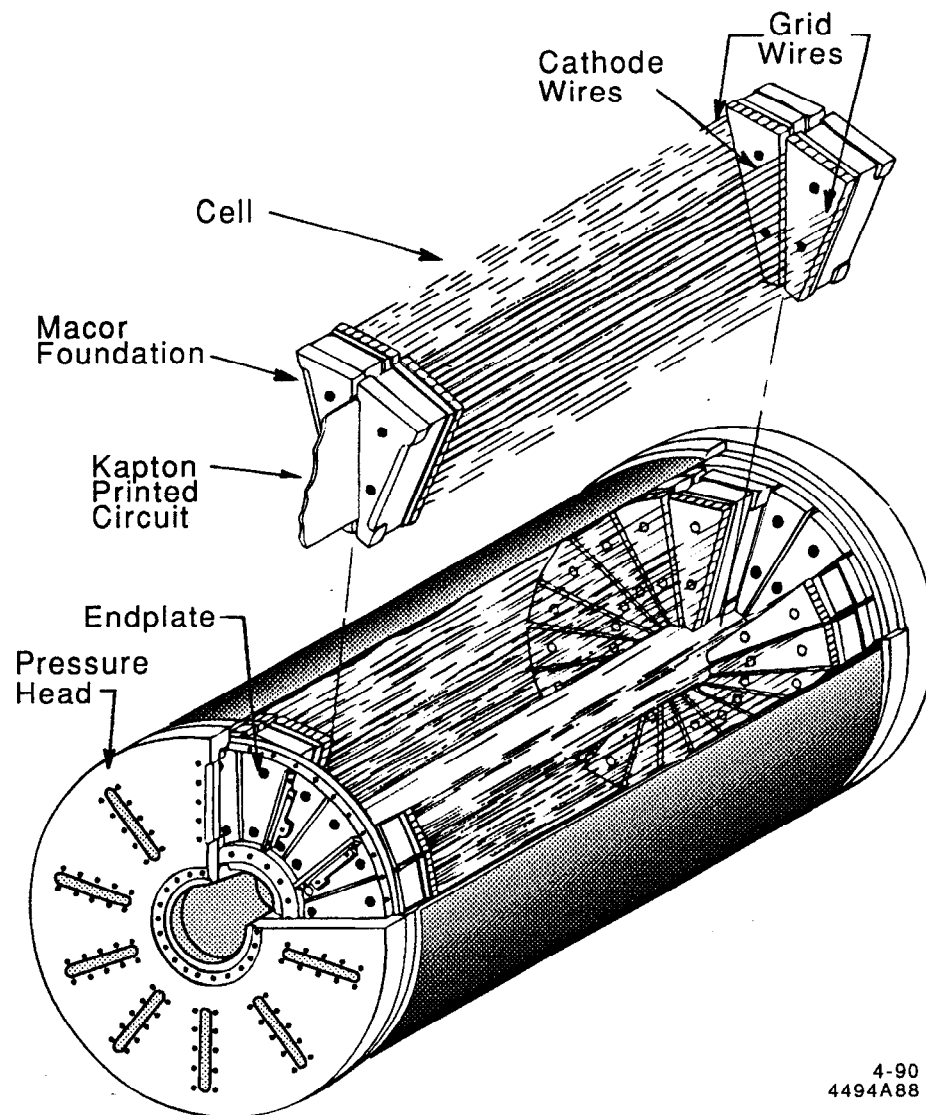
Mechanical assembly of the DCVD, illustrating the modular assembly of the cells on the Macor foundations.
